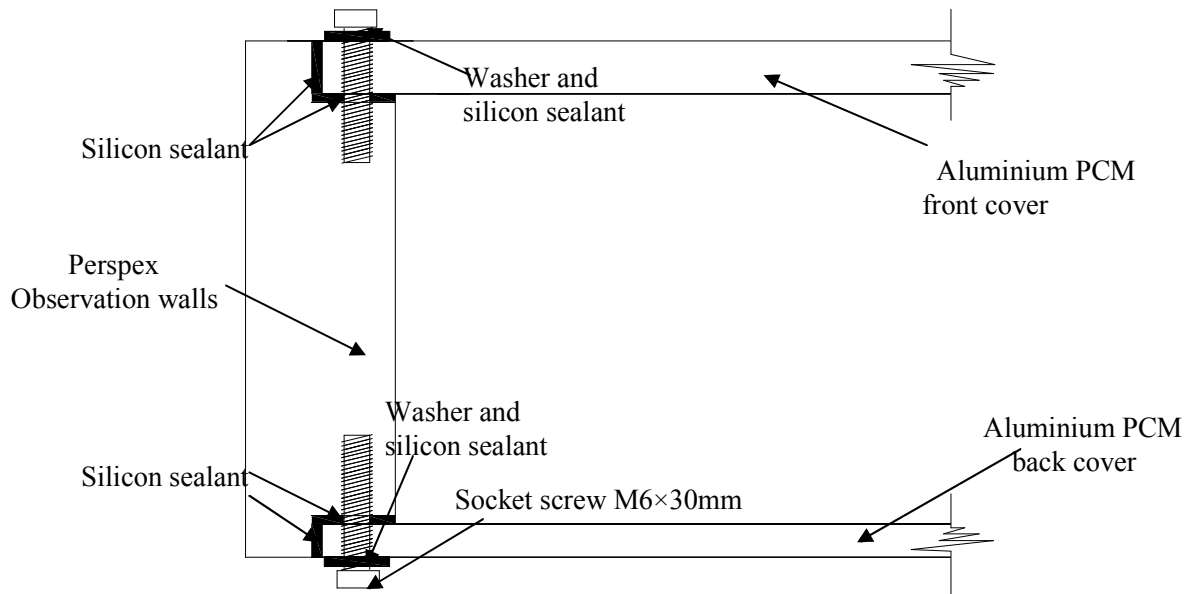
Profiles of the joint between Perspex observation walls and aluminium sheets
